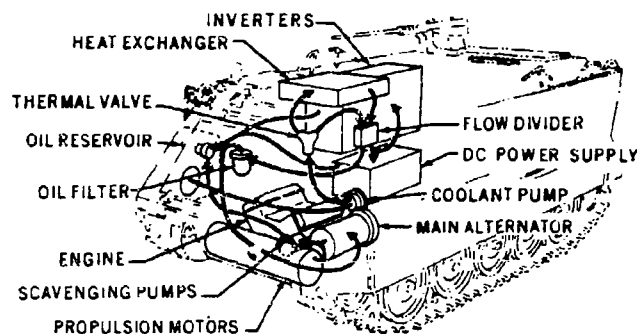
Electric Drive System for M113 Vehicle (Ref. 12)
